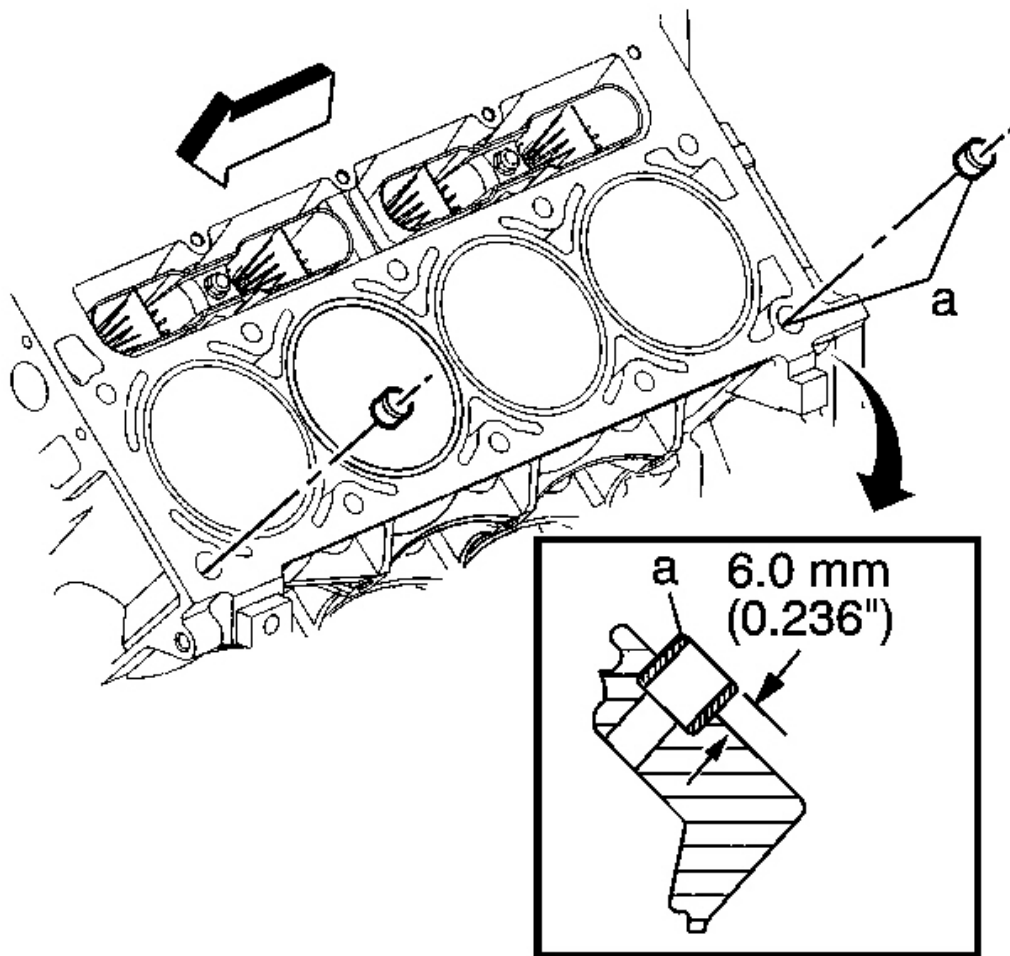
Identifying Cylinder Head Locating Pins Installation Position
